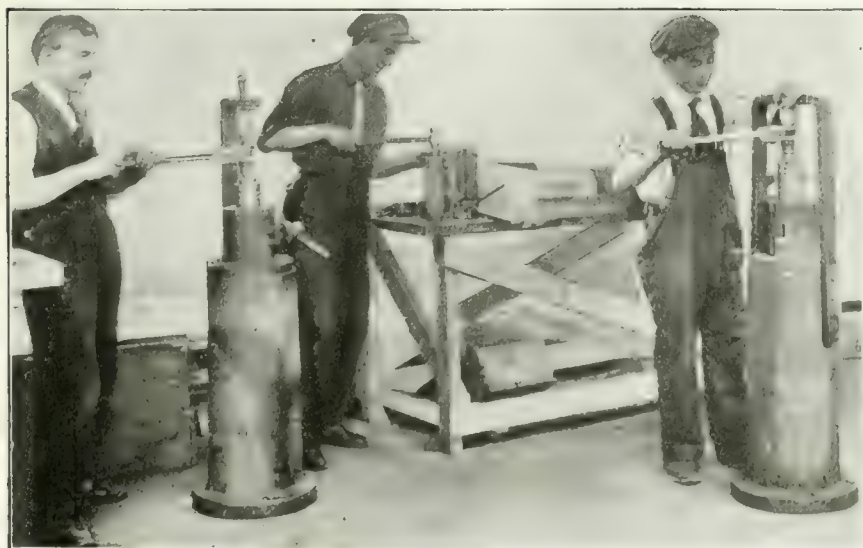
SCREWING AND RIVETING REINFORCING DISCS INTO BASES OF HIGH EXPLOSIVE SHELLS.
